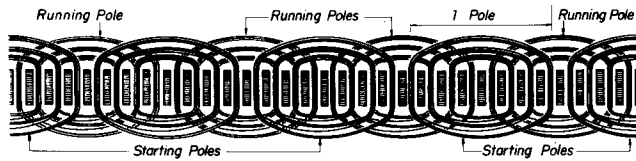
A diagram of the stator in Fig. 10 with slots and windings shown as they would look if rolled flat. The starting-winding poles are located between two running-winding poles.
